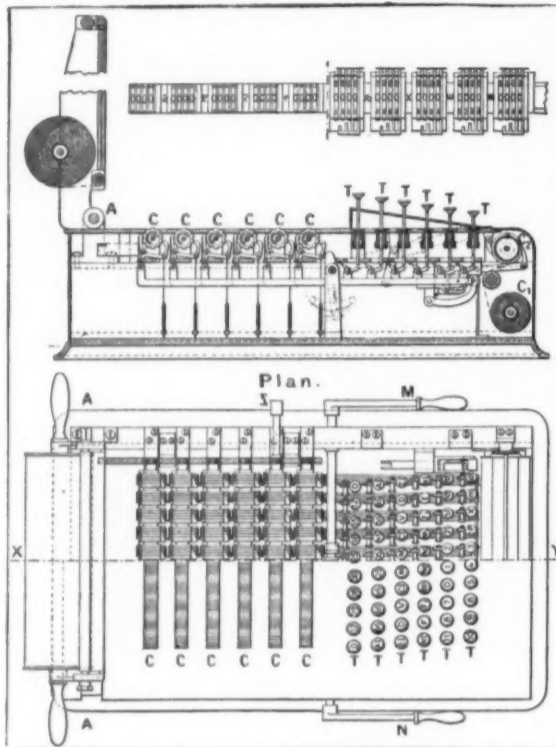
SECTION AND PLAN OF THE MACHINE.
